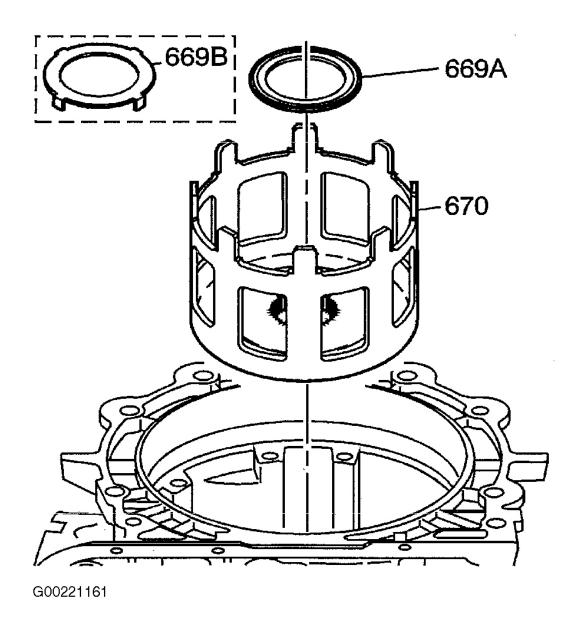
Removing Thrust Washer & Reaction Sun Shell
